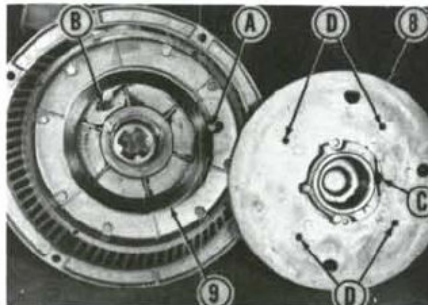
View of starter housing with pulley removed, showing proper installation of recoil spring. Loop (B) in inner end anchors in hole (C) in pulley. Outer end is installed over anchor pin (A).
